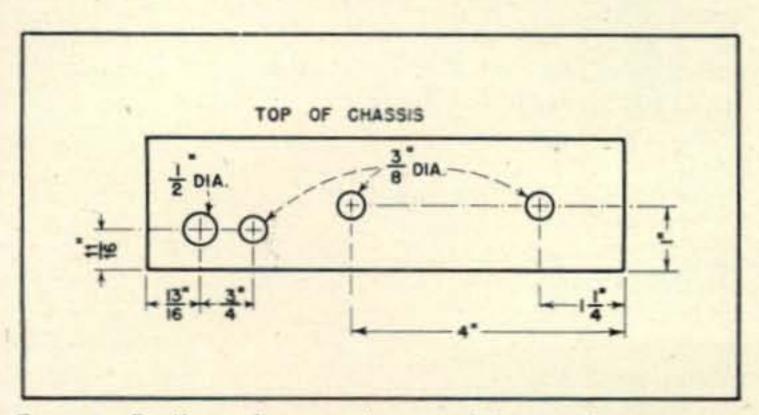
Drilling layout for modifying the original chassis to permit mounting of controls.
